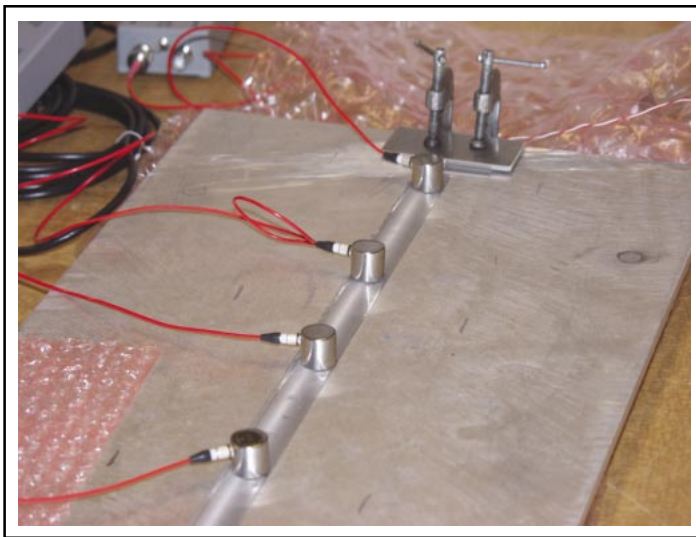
Aluminum-lithium friction stir welded coupon for tests with acoustic emission sensors and piezo actuator
